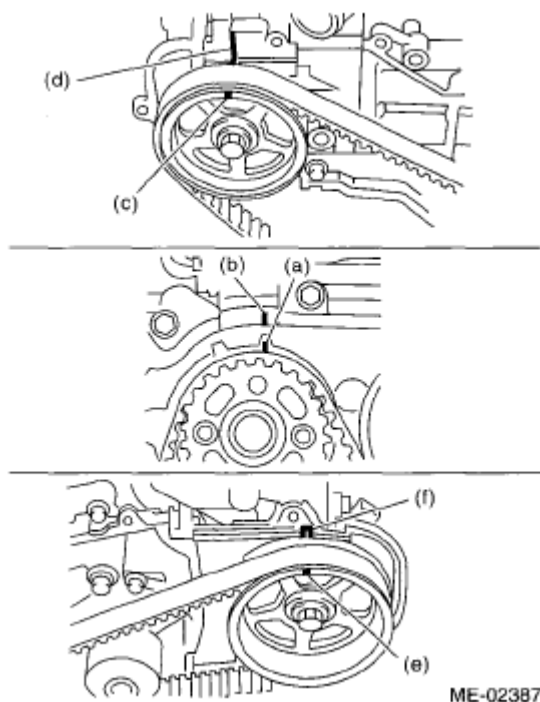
Aligning Mark Of Sprocket To Cylinder Block Notch
